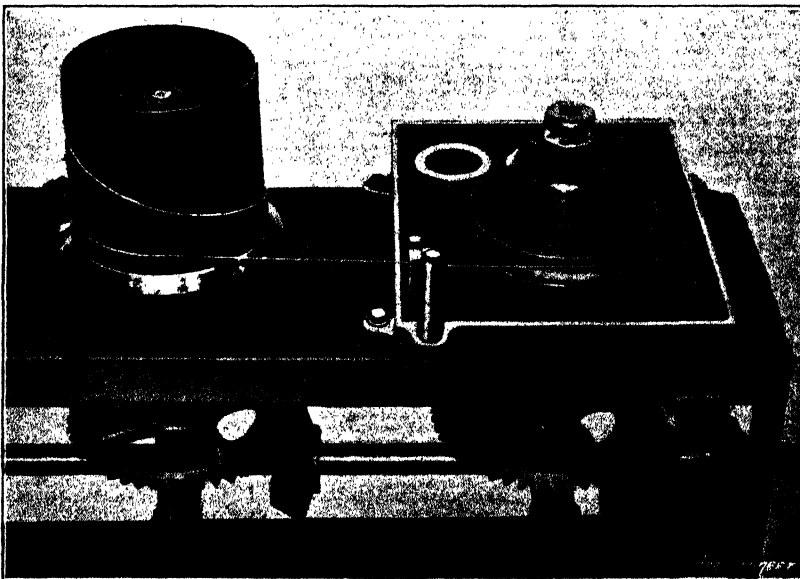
THREE-HOLE WET DRAWING MACHINE—G. CROSSLEY.
